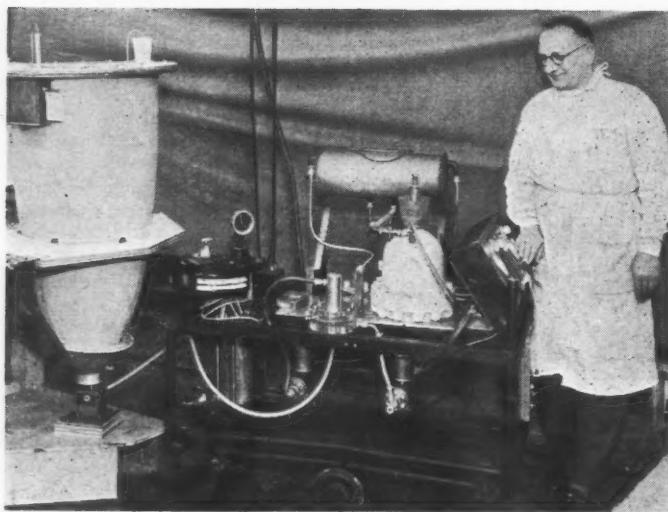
Injection moulding a glass fibre resin bonded radome shell
